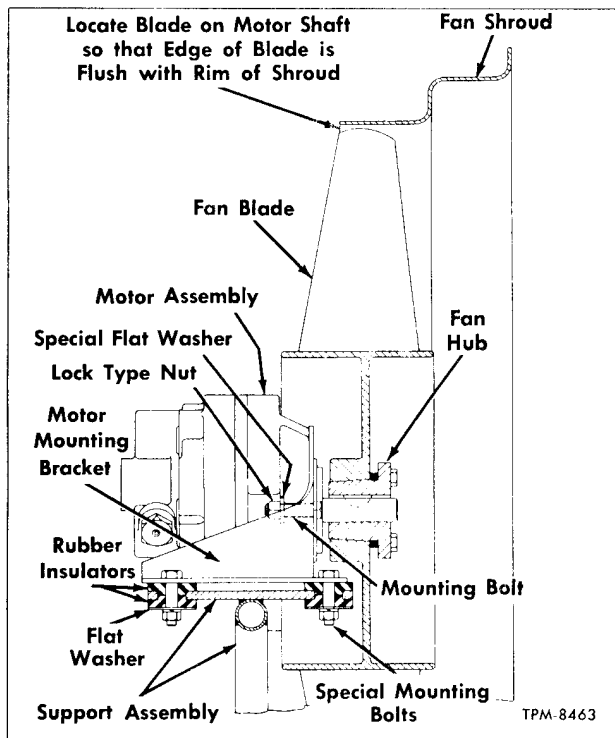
Condenser Fan Blade Alignment and Motor Mounting
